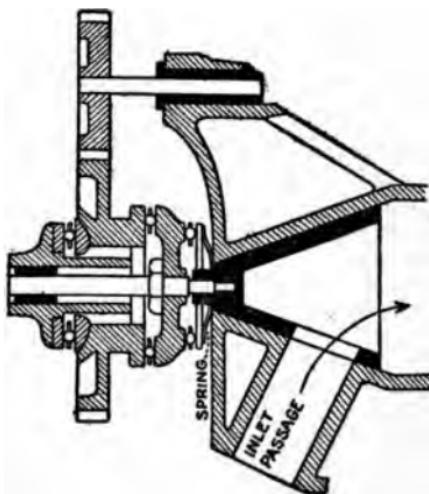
Coned rotary ring valve in cylinder head. Such valves may be single for both ports, double, side by side, one for each port, or nested, one within the other, acting differentially like a double-sleeve valve.
